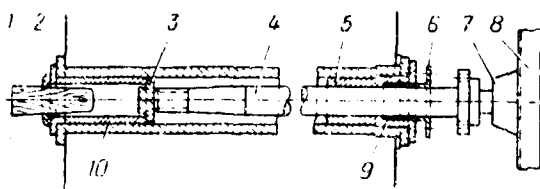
Extrusion of Stern Deadwood Sleeve with Use of Propeller Shaft: 1 - wooden plug; 2 - resinous packing material or oakum; 3 - forming flange; 4 - propeller shaft; 5 - bow deadwood sleeve; 6 - deadwood stuffing box; 7 - jack; 8 - support channel bar; 9 - gasket packing; and 10 - stern deadwood sleeve (bushing).
